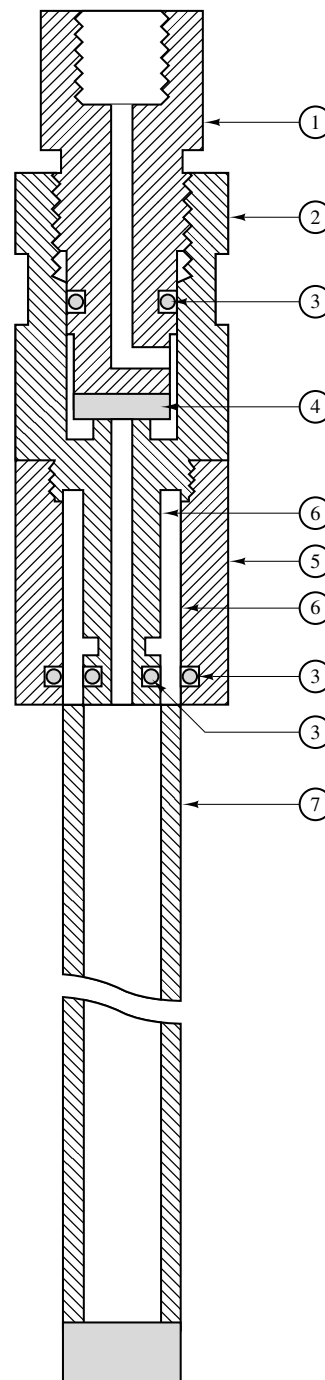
Schematic drawing of titanium valve and sapphire tube assembly by Horváth and Ponce.^{8c} (1) valve stem, (2) valve body, (3) Viton O ring, (4) glass filled Teflon seat, (5) valve body end cap, (6) adhesive, and (7) sapphire tube
